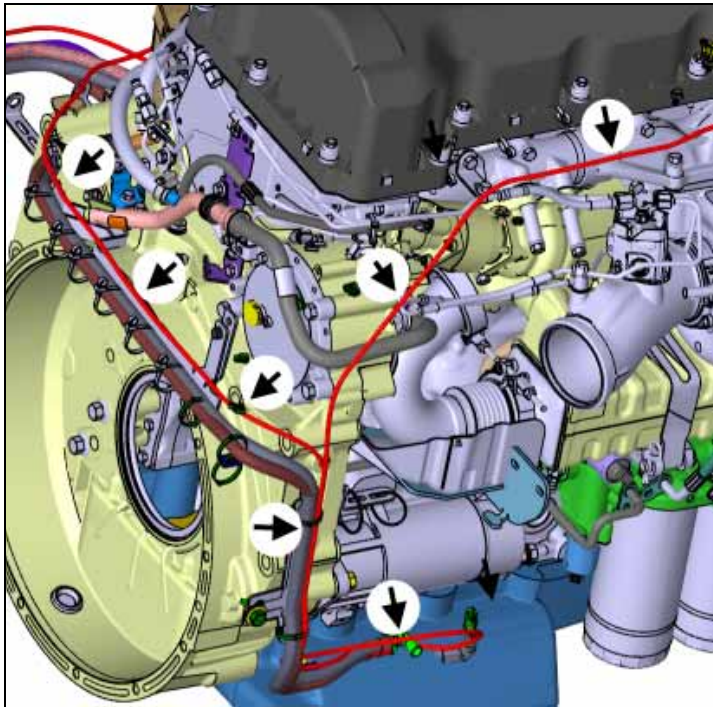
ENGINE HOT SIDE - REMOVE LTD
